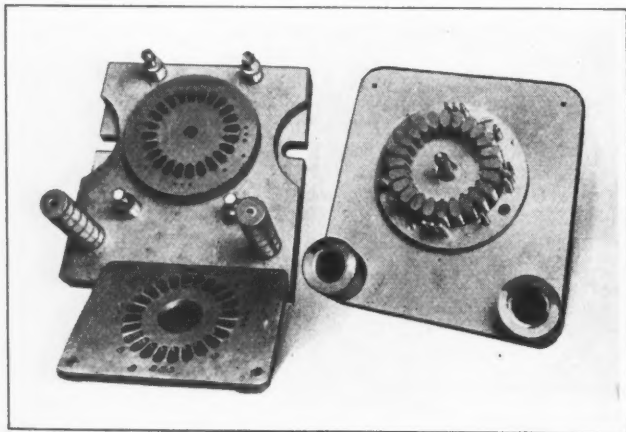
Punch, Stripper Plate, and Die used for punching the Holes in the Stator Laminations
